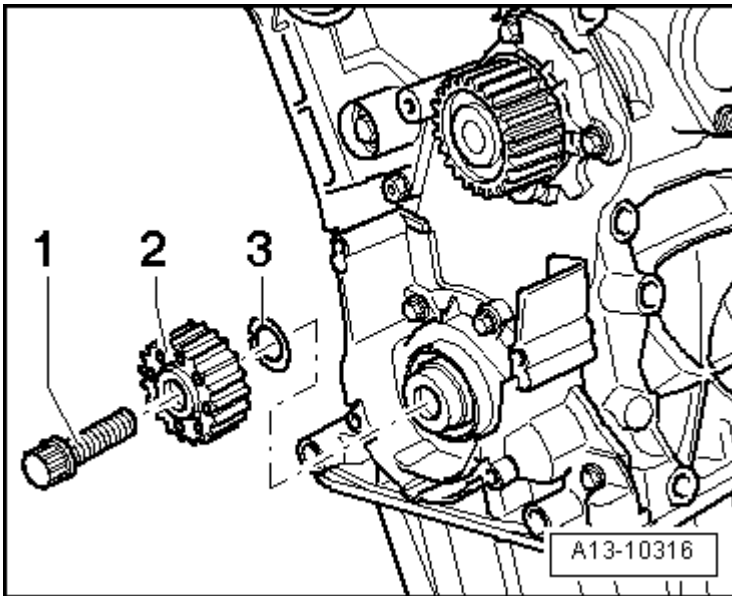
Identifying Center Bolt, Crankshaft Toothed Belt Gear & Diamond Disc
